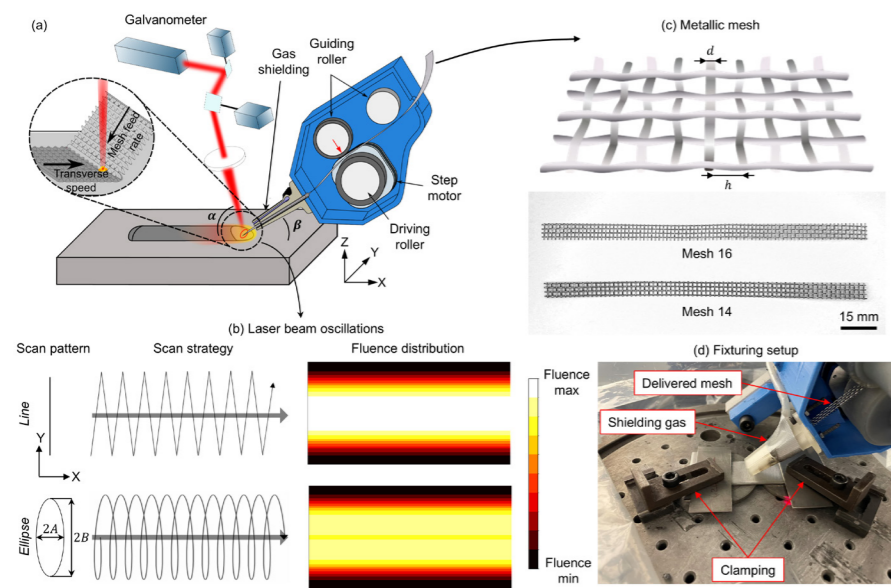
Experimental setup in this work illustrating the mechanism that was used to realise the mesh deposition
